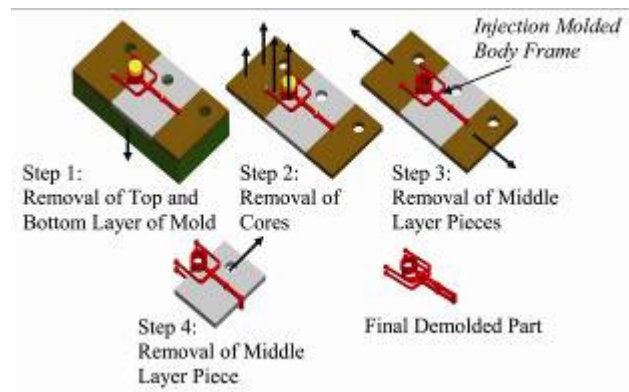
Parting surface design for in-mold fabrication of the body-frame
